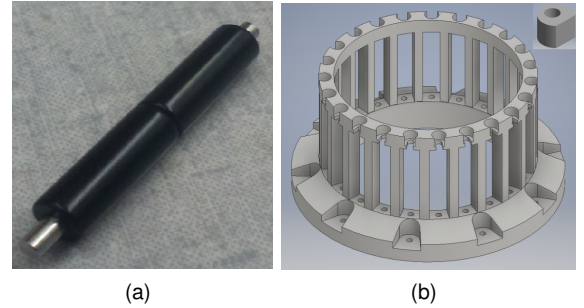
Planet gear assembly design (a) an assembled planet magnet on a stainless steel shaft, and (b) planet carrier.
